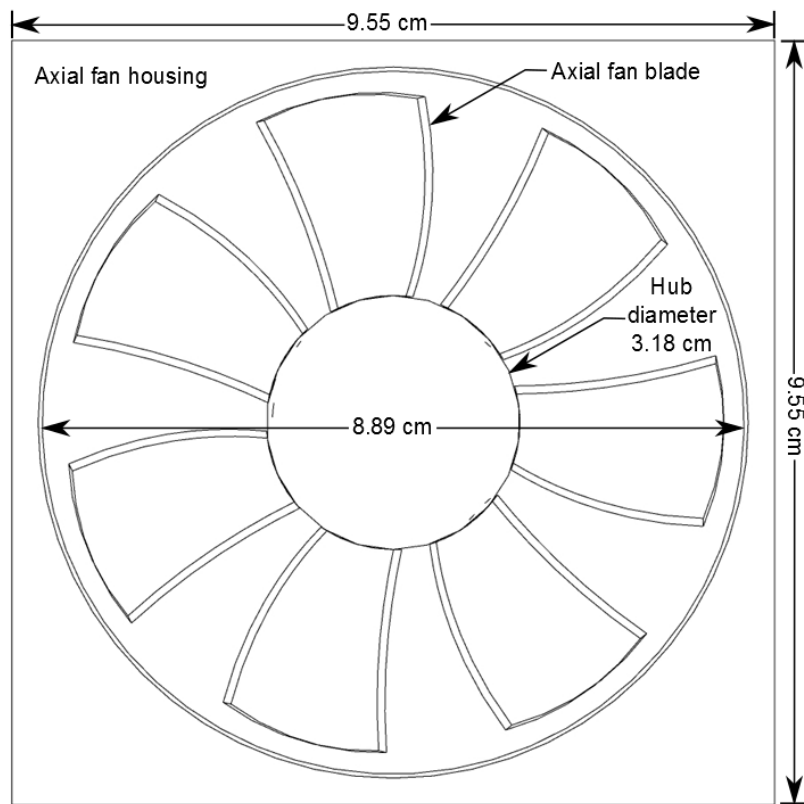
Head-on view of the face of the fan displaying dimensions.
